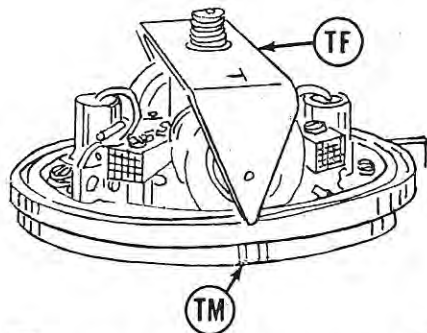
Timing fixture (TF) installed and aligned with armature plate timing marks (TM) for adjusting points for upper cylinder. Refer to text.
